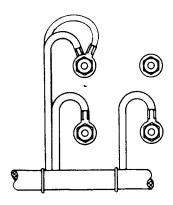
Switches — Tumbler, Toggle, Snap — Front Mounted, Rear Wired and Connected — No. 14 Gauge and Smaller Wires
